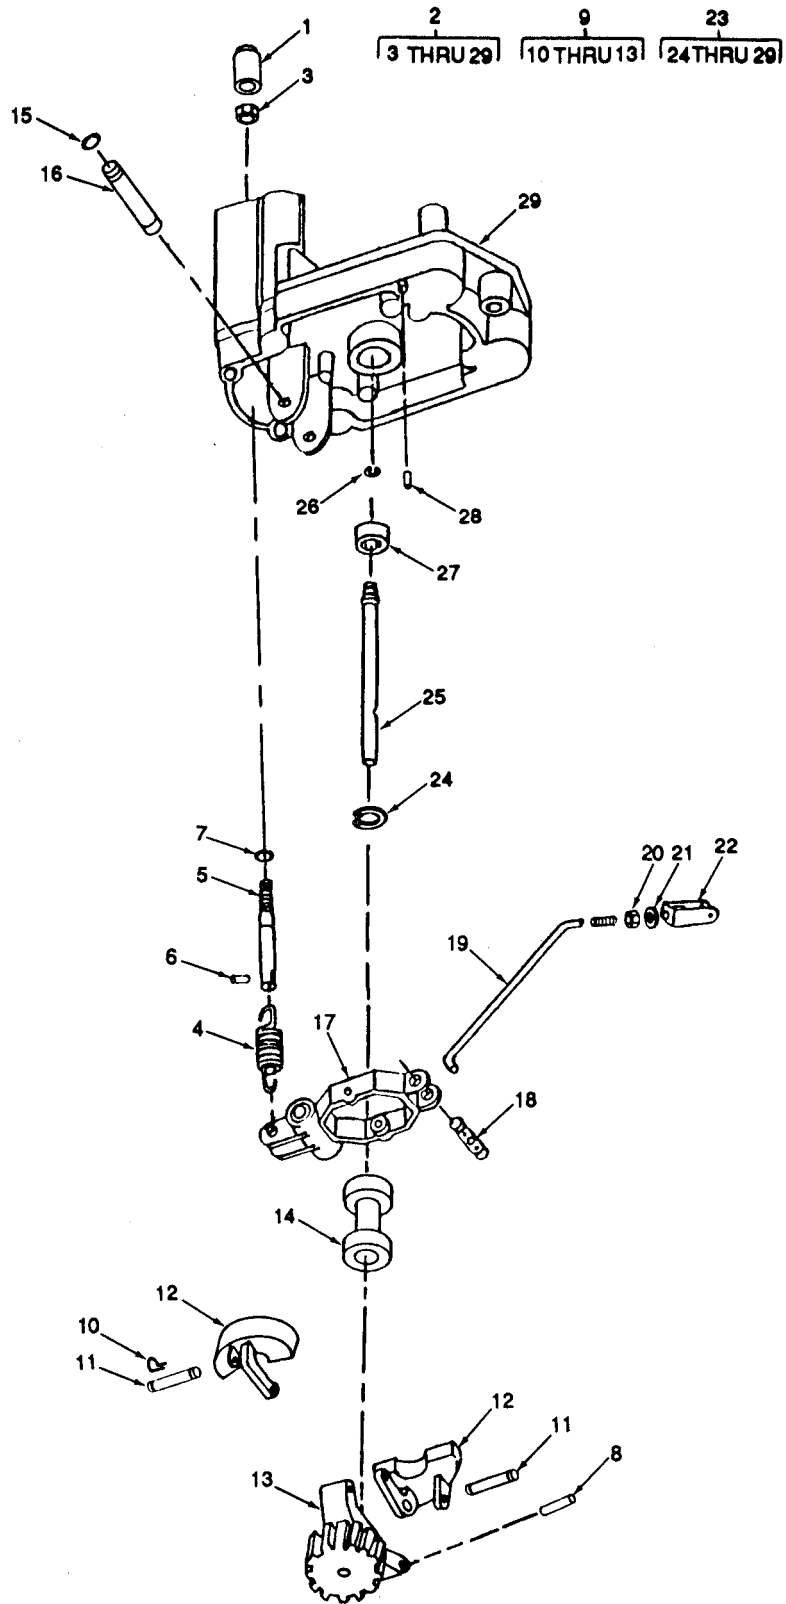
Engine Speed Governor Assembly (with Plastic Gear)
